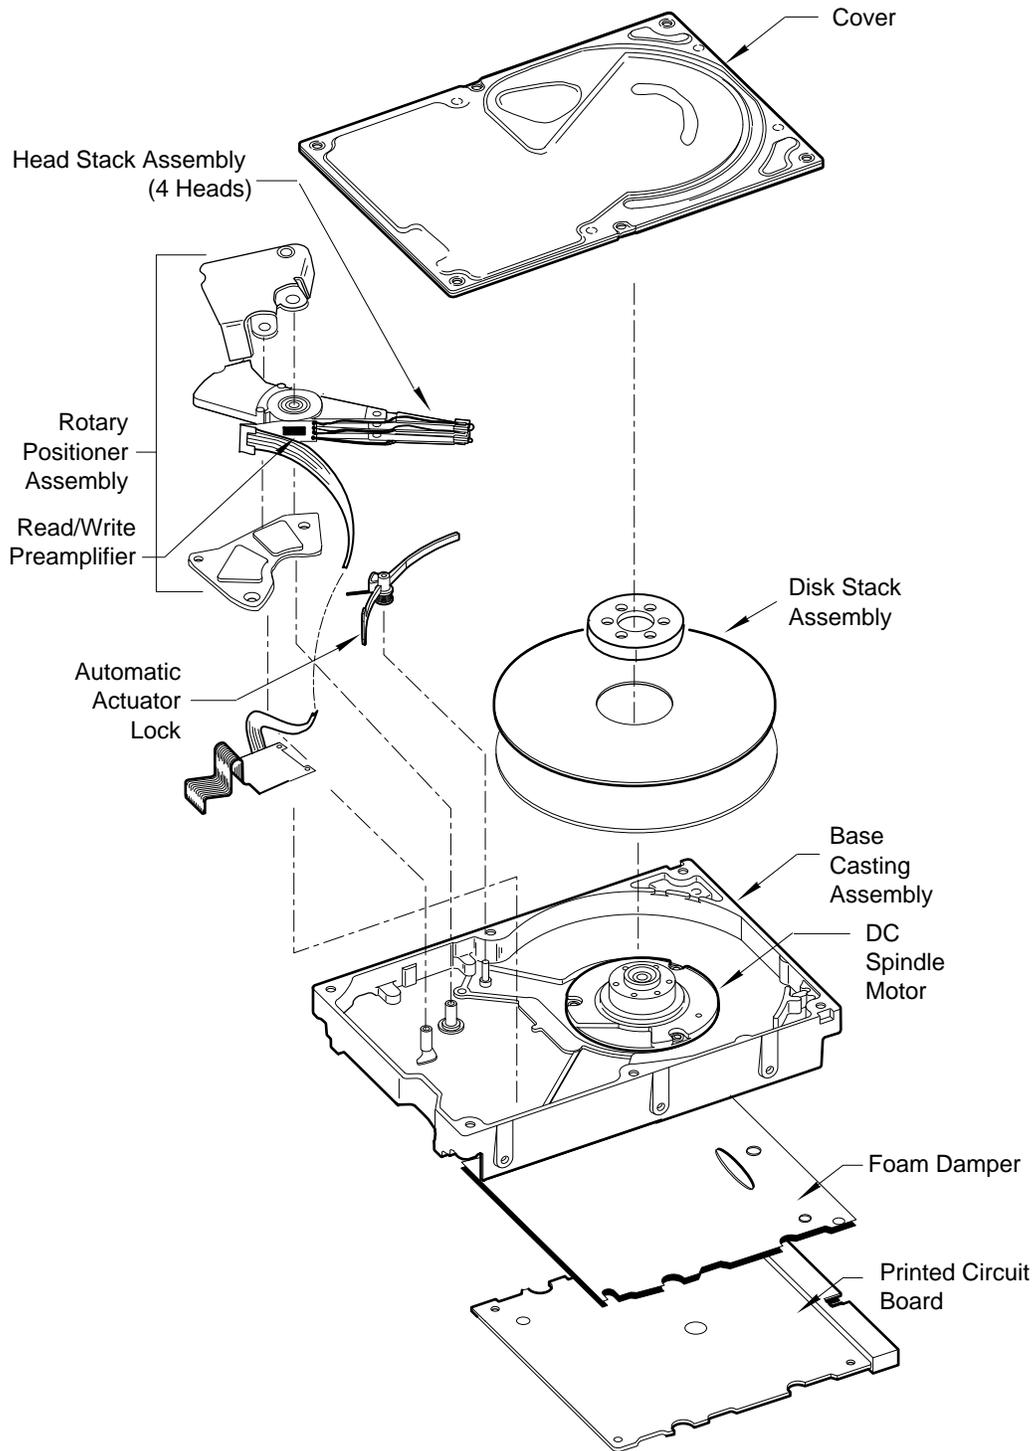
Quantum Fireball TM (Two-Disk) Drive Exploded View
